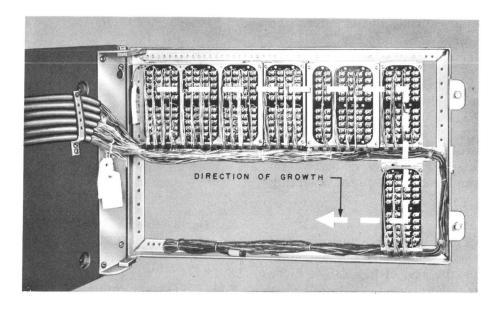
Key Cables Run Directly to Apparatus Mounting
